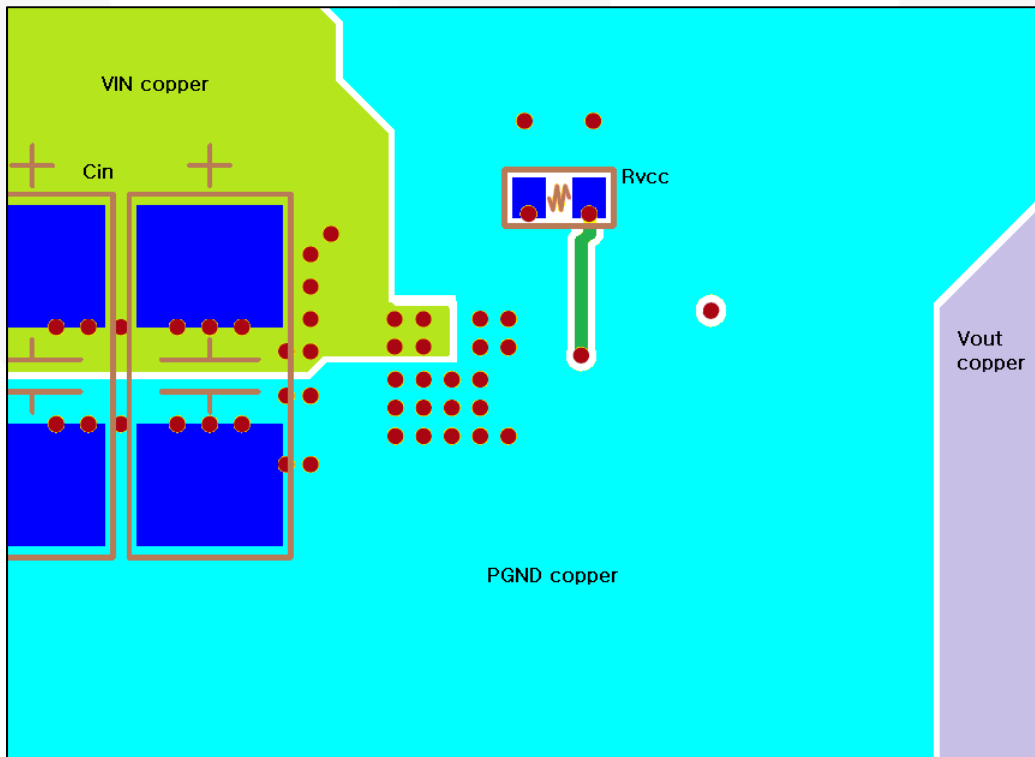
Single-Phase Board Layout Example – Bottom View (Mirrored)
